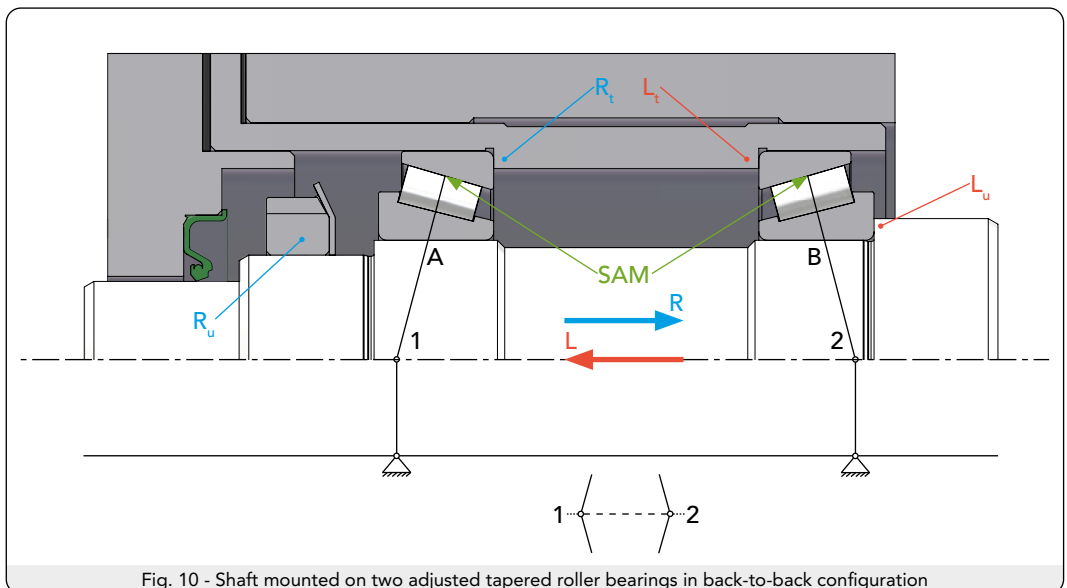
Shaft mounted on two adjusted tapered roller bearings in back-to-back configuration
